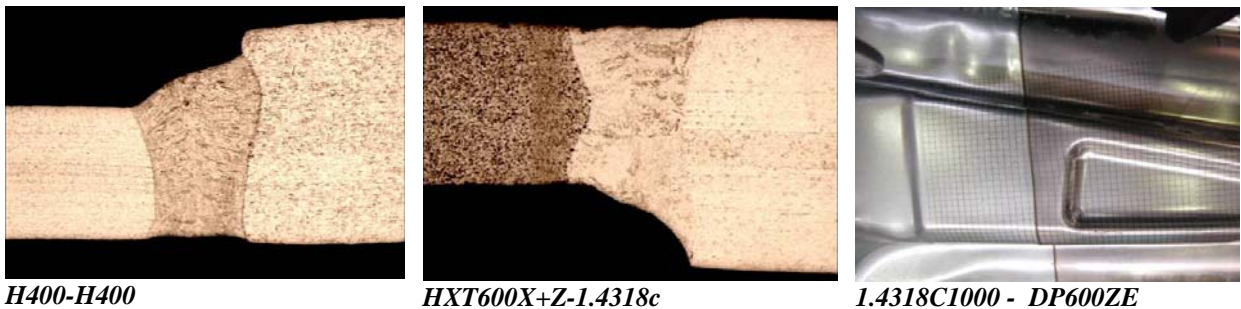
Micrographs of stainless-stainless and mixed laser weld, tailor welded blank
